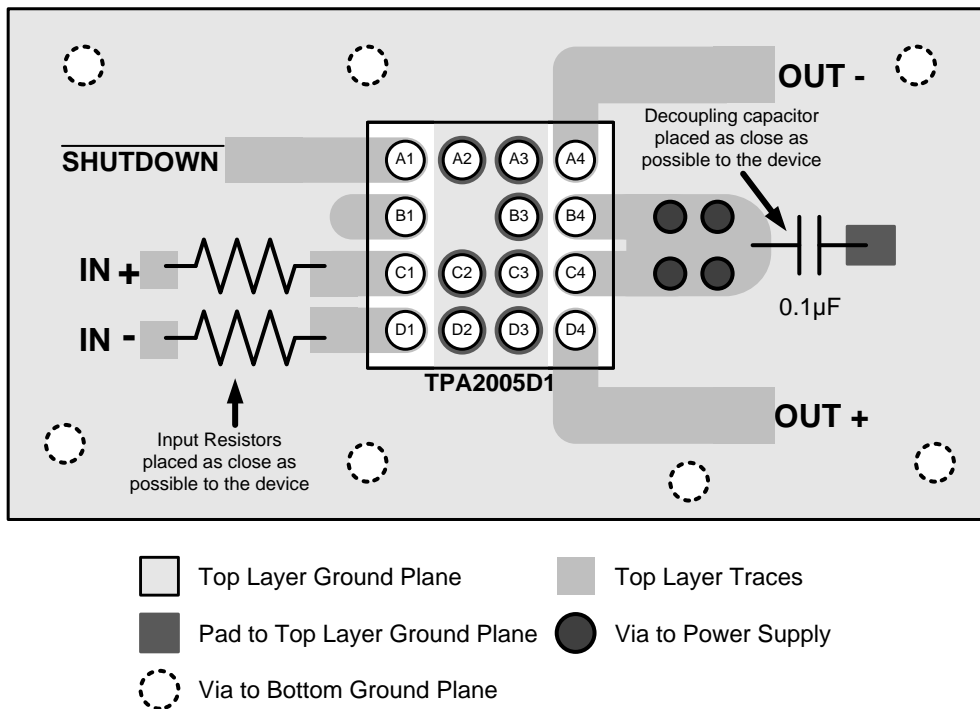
TPA2005D1 MicroStar Junior™ BGA Package Layout Example
